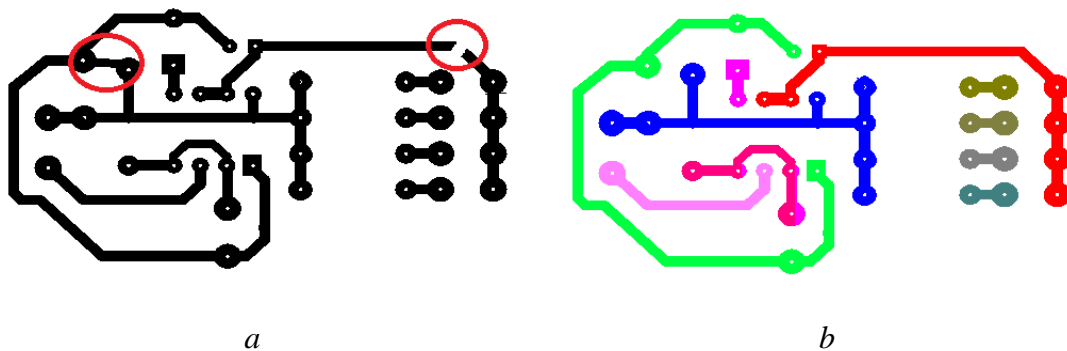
Image of a PCB with two defects (a); the etalon PCB image after flood filling (b)
